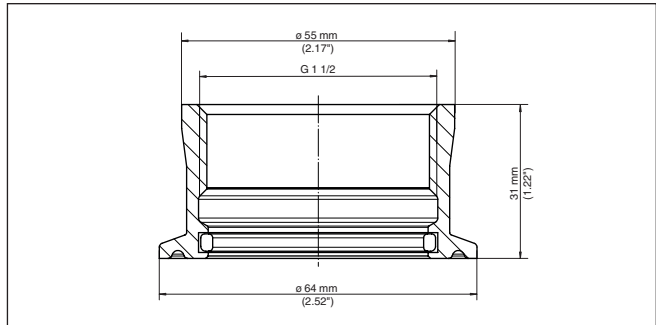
Dimensions of threaded adapter G1 $\frac{1}{2}$  (DIN 3852-X) on Clamp 2" (DIN 32676, ISO 2852) PN 16
